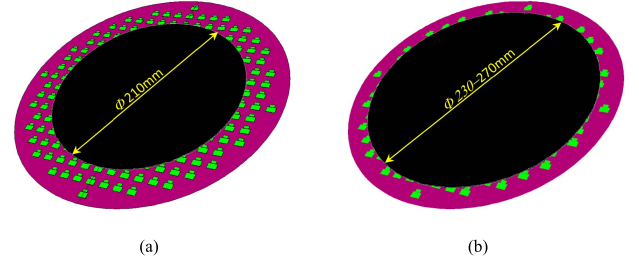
Initial diameter of the molding compound. (a) Original dispensing pattern (standard case). (b) Enlarged dispensing pattern.
